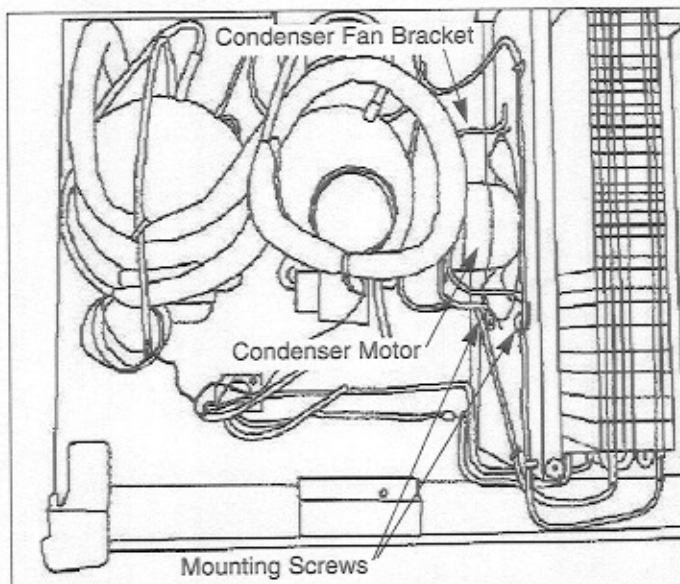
Model 611, 632, 642, 650, 690 Condenser Fan
